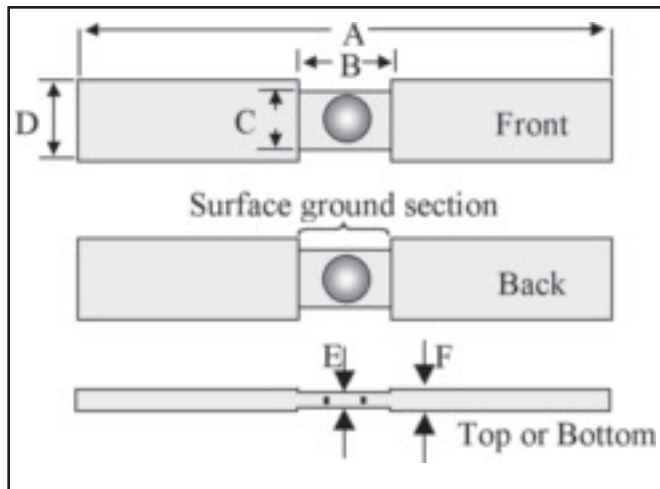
Final STF sample geometry showing dimensions and spot weld location. A = 12.7 cm (5 in.), B = 19 mm (0.75 in.), C = 15.3 mm (0.6 in.), D = 19 mm (0.75 in.), E = nominally 5.6 mm (0.22 in.), F = 6.4 mm (0.25 in.). Gauge marks were made on the top and bottom of the sample with a nominal spacing of 4 mm.
